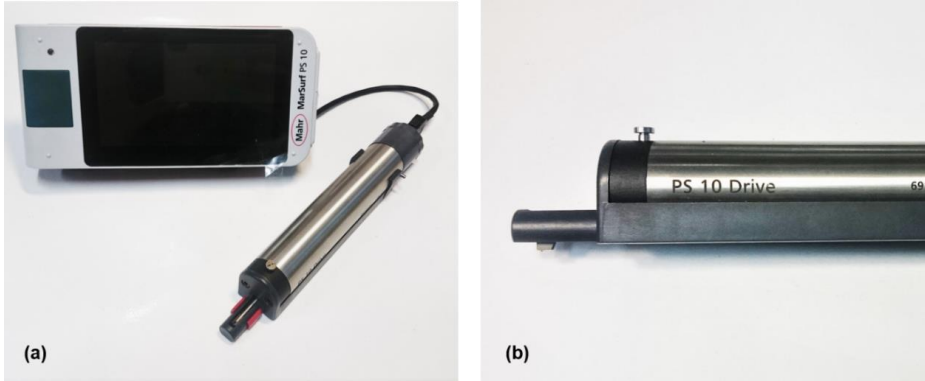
Surface roughness measurement tool: (a) MarSurf PS10, with (b) a removable drive unit and stylus probe
